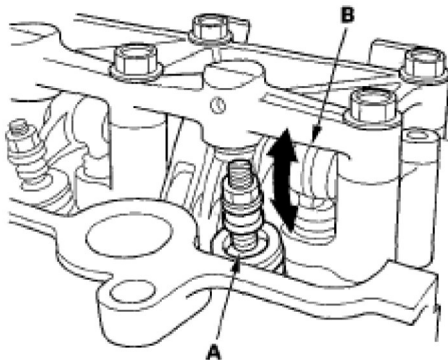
Locating Exhaust 1st Rocker Arm & 2nd Rocker Arm
